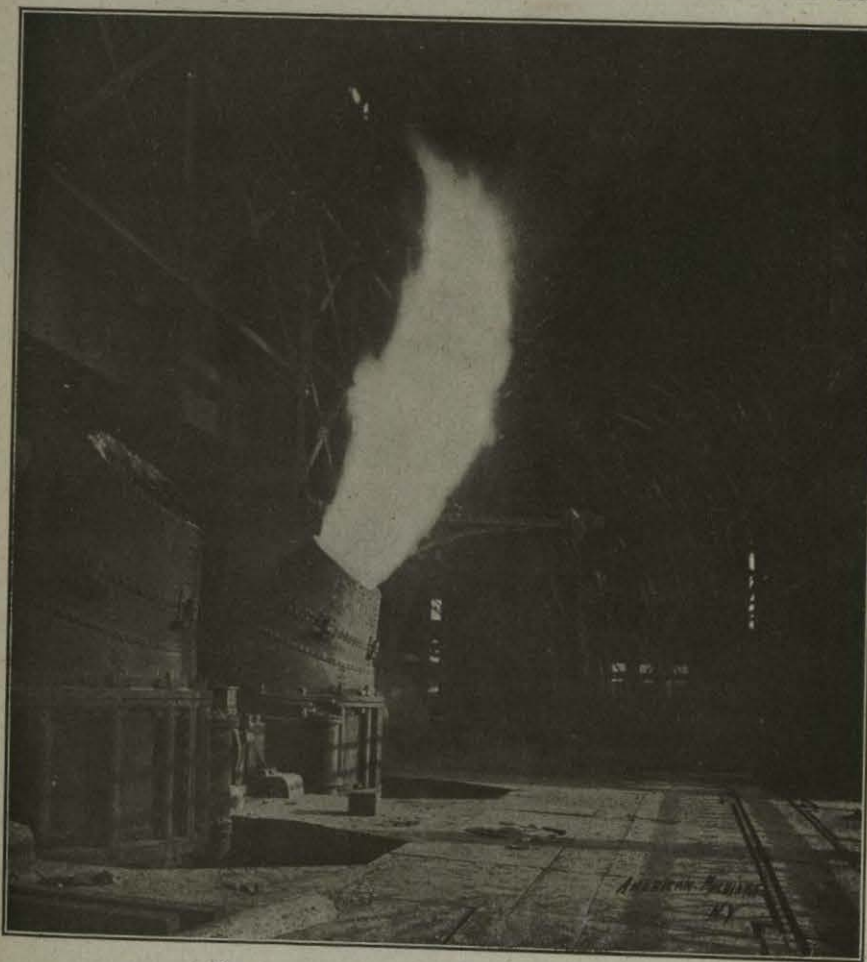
Bessemer converter tilted to pour finished metal into ladle.
